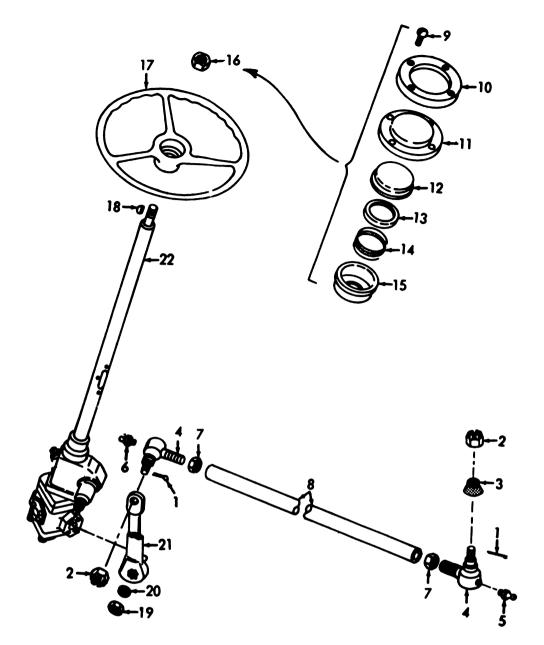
Steering wheel, trailer brake control, removal and installation. (sheet 1 of 2).
